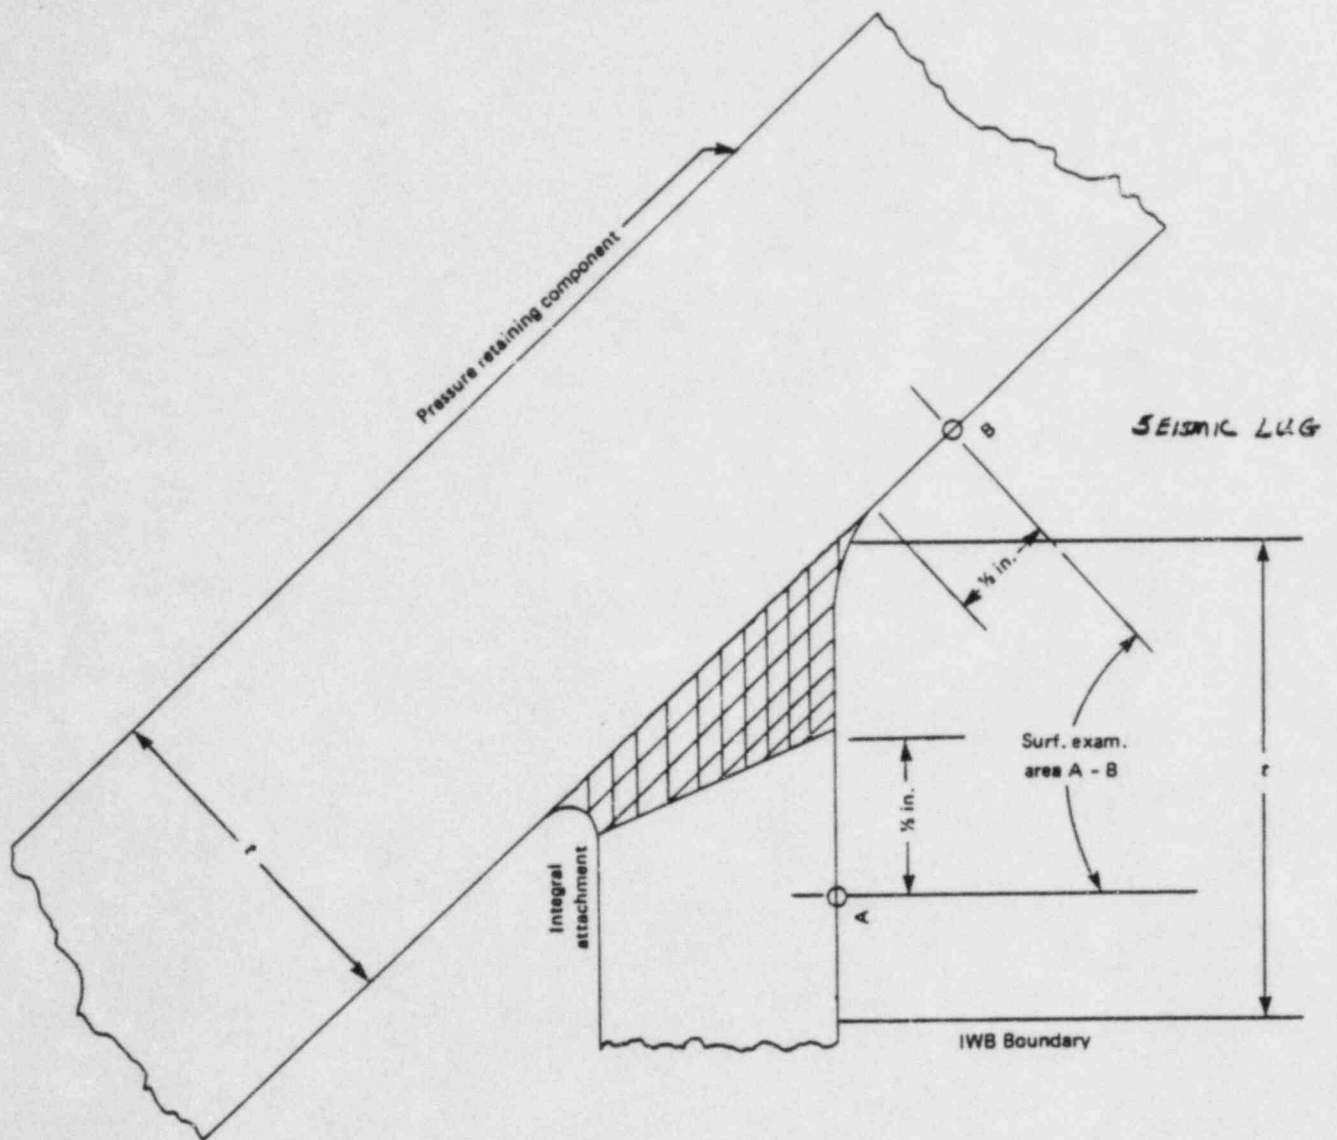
INTEGRAL ATTACHMENT WELD
